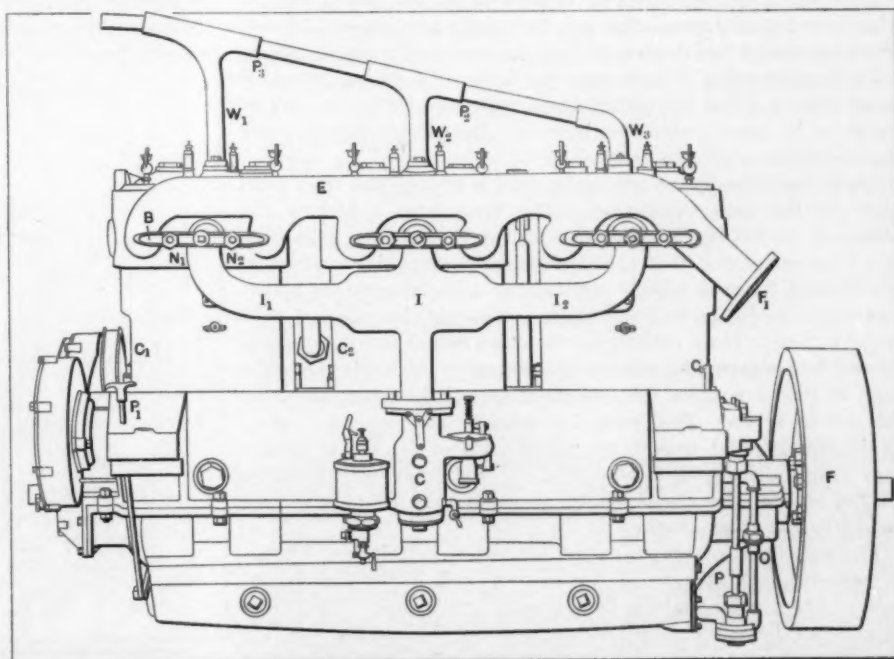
Left-hand side of the six-cylinder motor showing the carburetor and manifolds together with water pump
